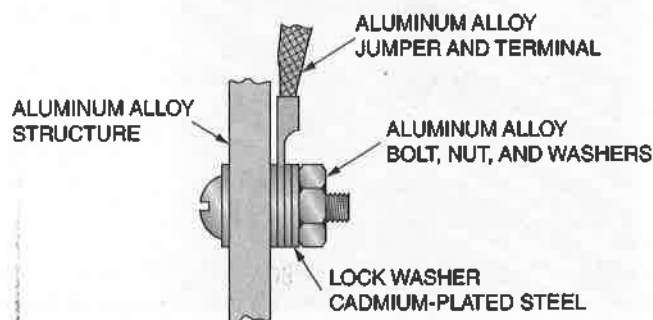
Attachment of a bonding jumper to an aluminum structure.
